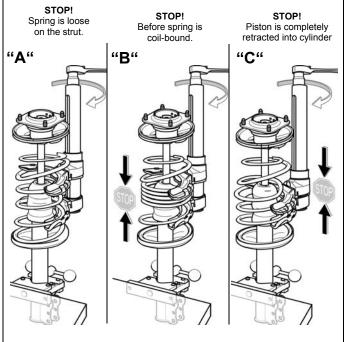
Compressing the spring until pressure on piston rod nut is fully relieved.
